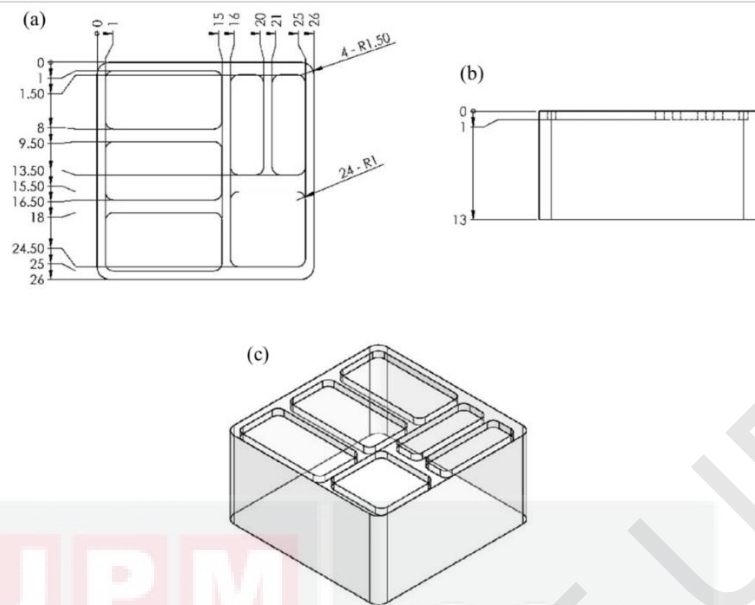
Dosimeter holder (D4): (a) Top view, (b) side view, (c) orthographic view
